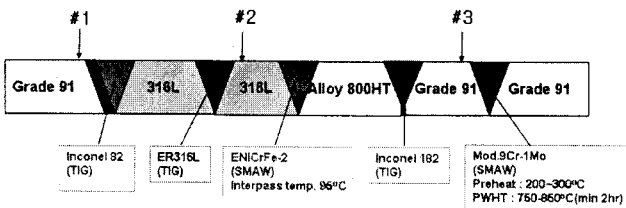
Details of materials, weldment's method and heat treatment
